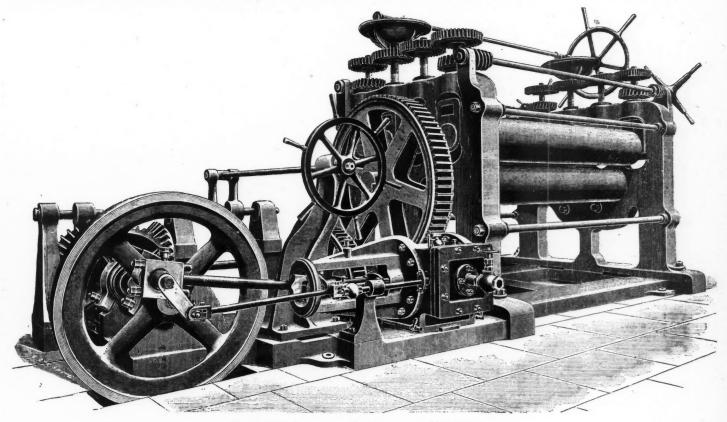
PLATE-FLATTENING AND STRAIGHTENING MACHINE.
